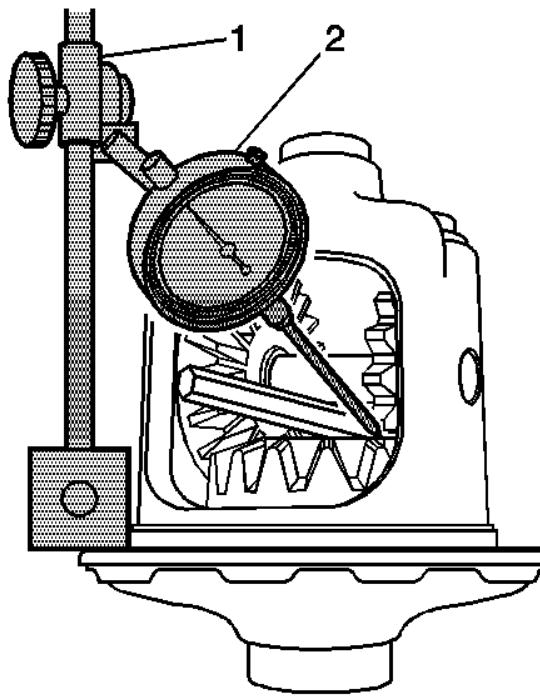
Measuring Backlash Of Differential Pinion Gear & Side Gear
